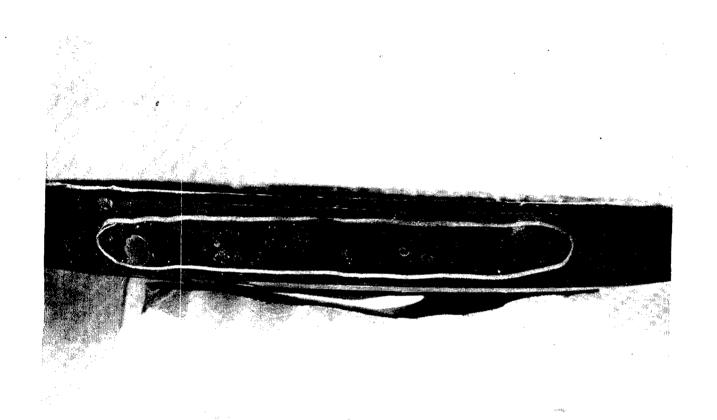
WHEEL NUMBER 6 AFTER TESTS. CLOSEUP VIEW OF UNDERCUTTING
